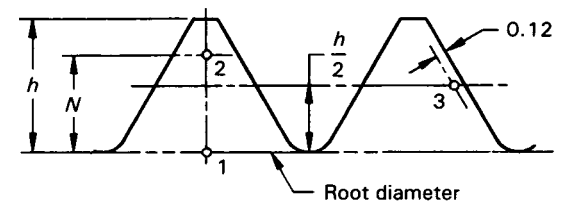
LOCATION OF HARDNESS TEST POINTS FOR CHECKING THREAD DECARBURIZATION
